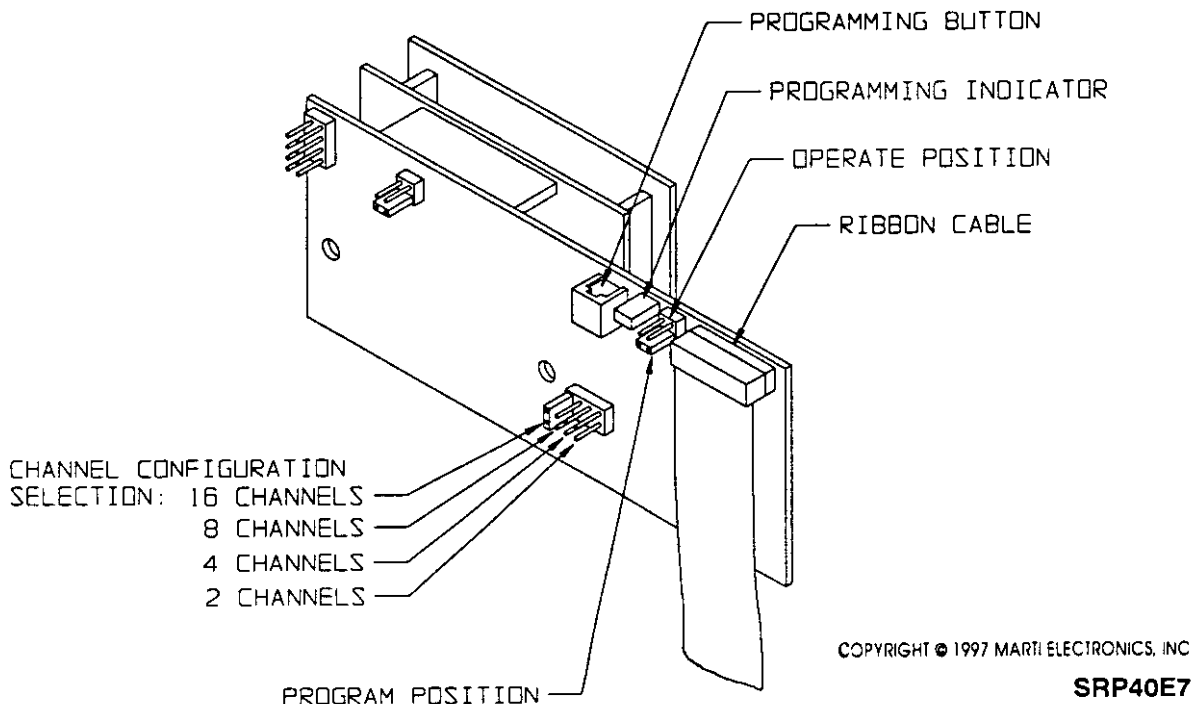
CONTROLLER CIRCUIT BOARD (VIEW FROM REAR OF UNIT)
